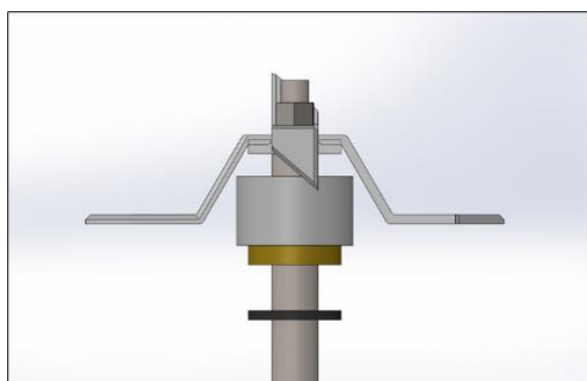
Design of isolated mixing blade and the fluid sealing unit. (A) SS mixing blade, (B) Nylon cap, (C) Brass bush, (D) SS power transmission shaft, (E) Flat rubber ring.
